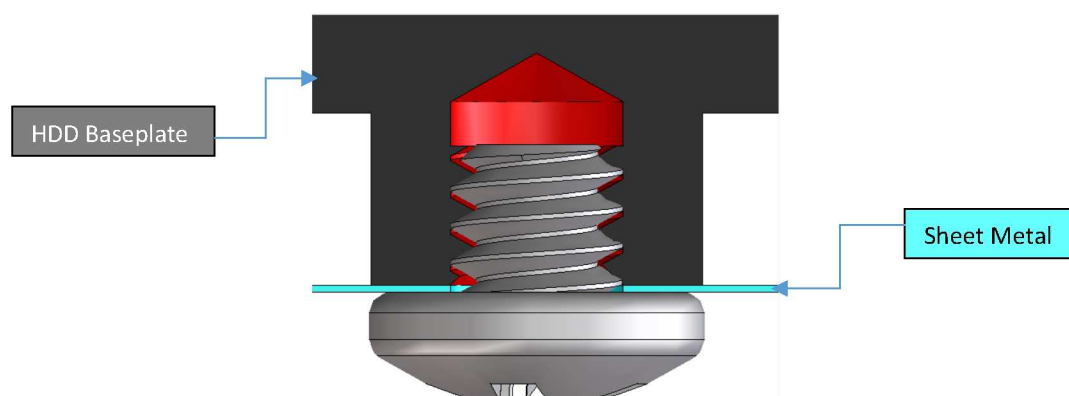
Bottom mount hole, 6-32UNC X 1/8" (3.8 threads engagement)
